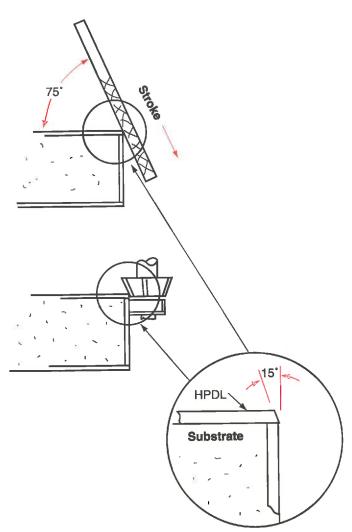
Bevel the surface laminate 15° with a mill file or bevel cutter bit installed in a laminate trimmer. (*Chuck Davis Cabinets*)
